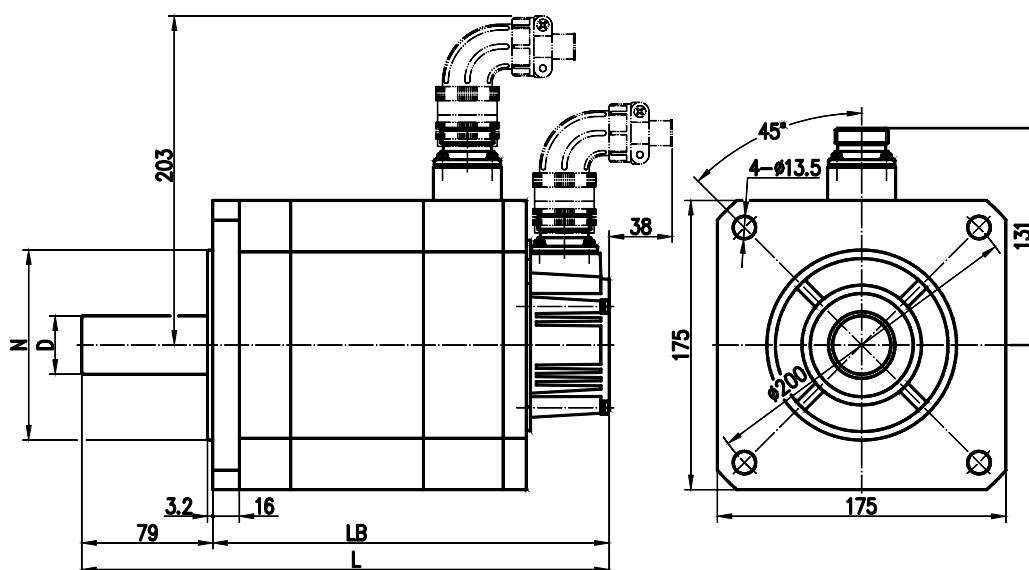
External view and installation dimensions of SJT series of AC servomotors with 175# base
